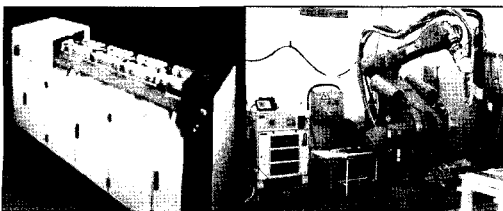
Nd:YAG laser(4kw) welding system
